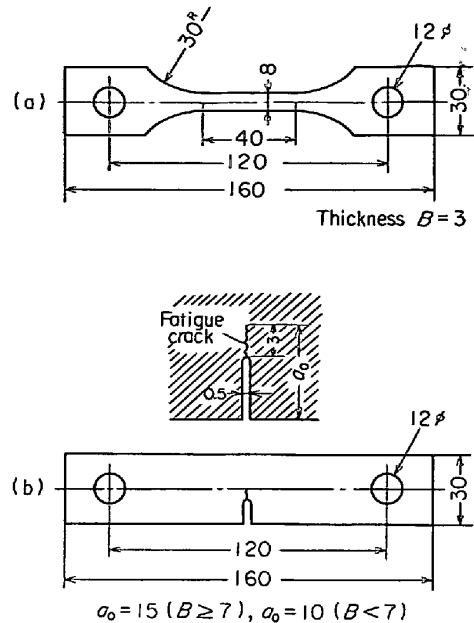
Specimen for (a) tensile test, and (b) fracture toughness test.
